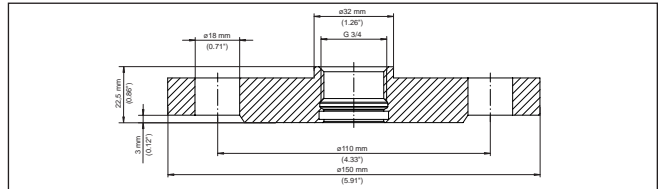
Dimensions of threaded adapter $G\frac{3}{4}$ (DIN 3852-X) on flange DN 40 (EN 1092-1, Form B1) PN 40
